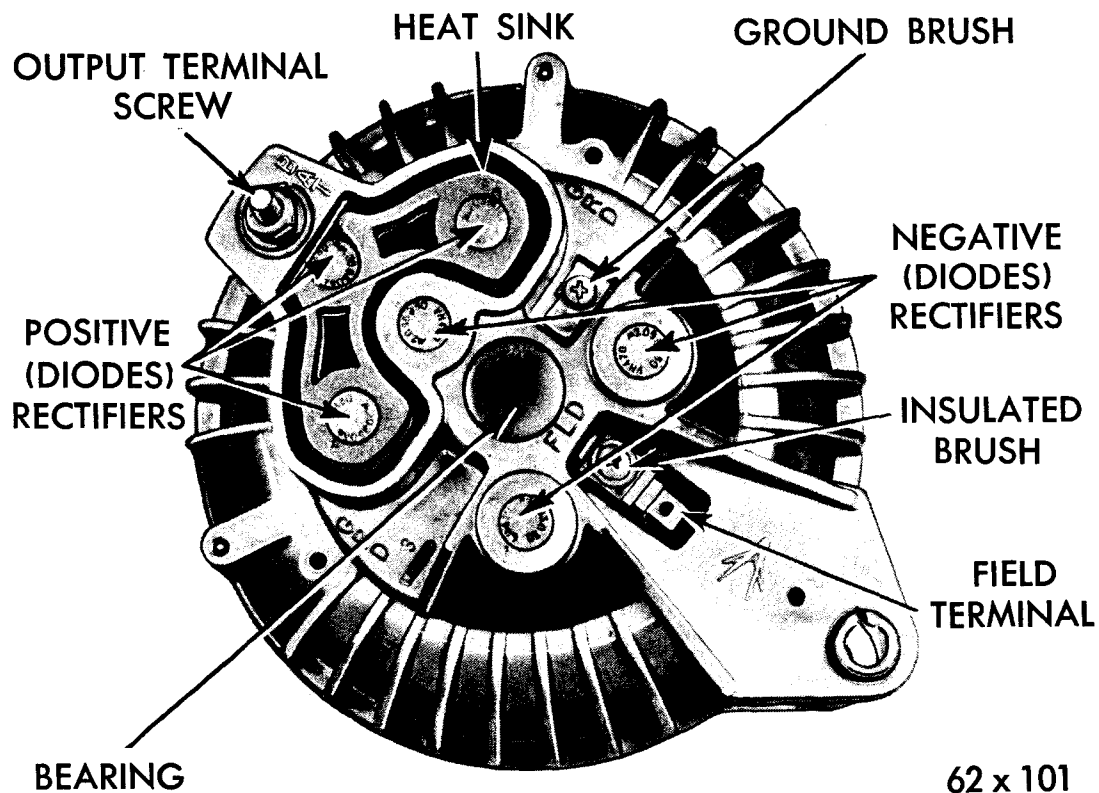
Chrysler 8-Cylinder Alternator Assembly (All Models)
